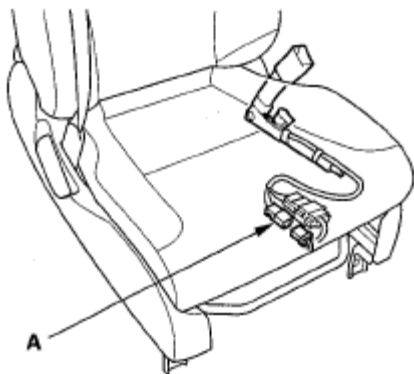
Identifying Front Passenger's Seat Belt Buckle Switch 3P Connector
